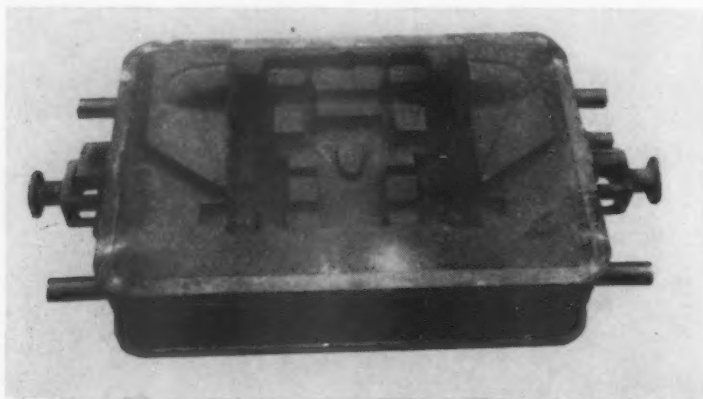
BOTTOM PART OF TRACK LINK MOLD.
